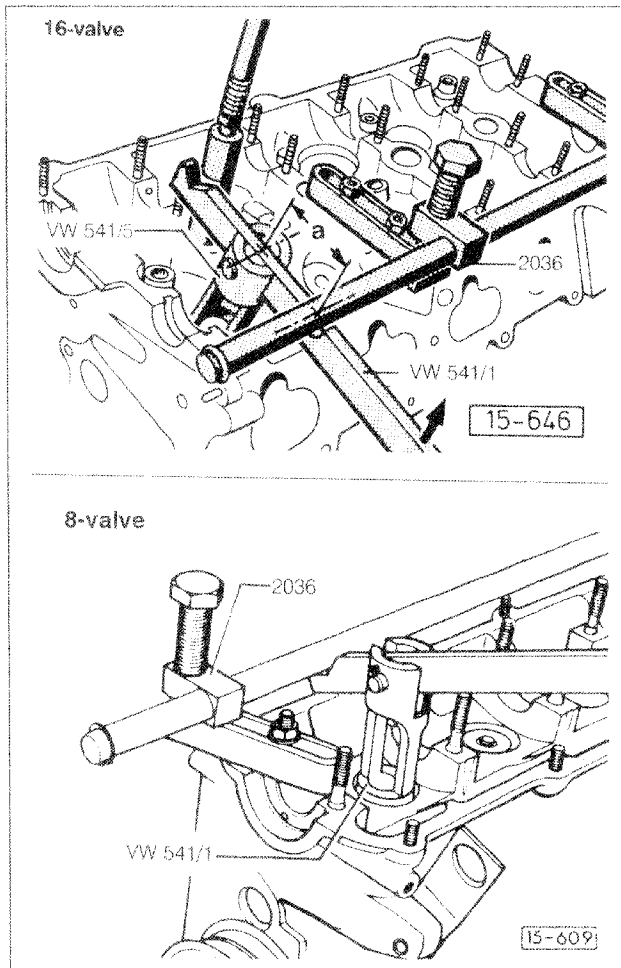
Valve spring compressor being used to remove valve springs from 16-valve engine (top view) and 8-valve engine (bottom view). Numbers identify Volkswagen special tools. For 16-valve engines, notch the handle of special tool VW 541/1 as shown to keep it from slipping. Dimension a to notch is 50 mm ($3\frac{1}{2}$ in.).
